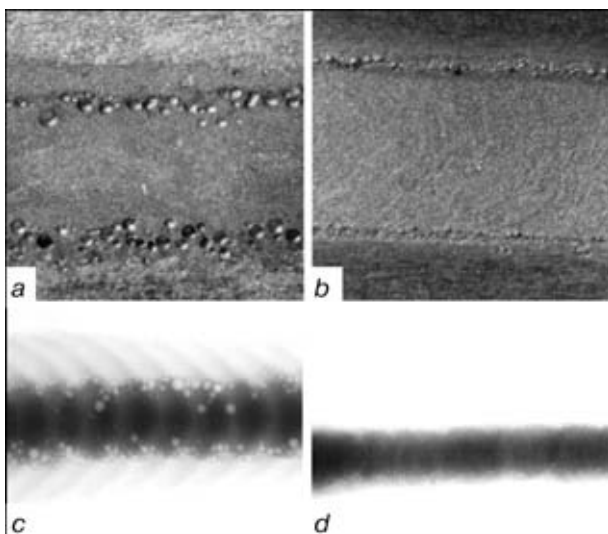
Macrosections of weld root with a removed bead (a, b) ($\times 2$) and X-ray photographs of welds of alloy 1420 (c, d); welding with a pulsed arc at $f_m = 1$ (a, c) and 5 (b, d) Hz
